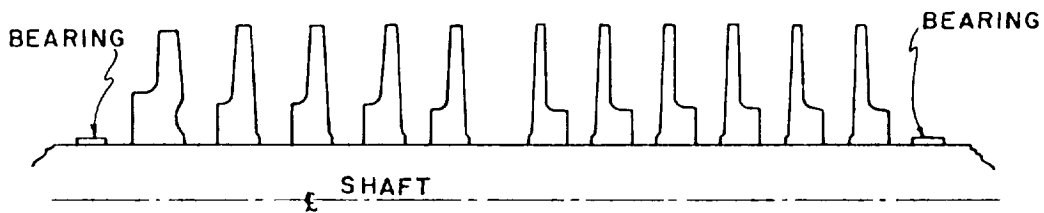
Schematic of 11-Stage Centrifugal Compressor
